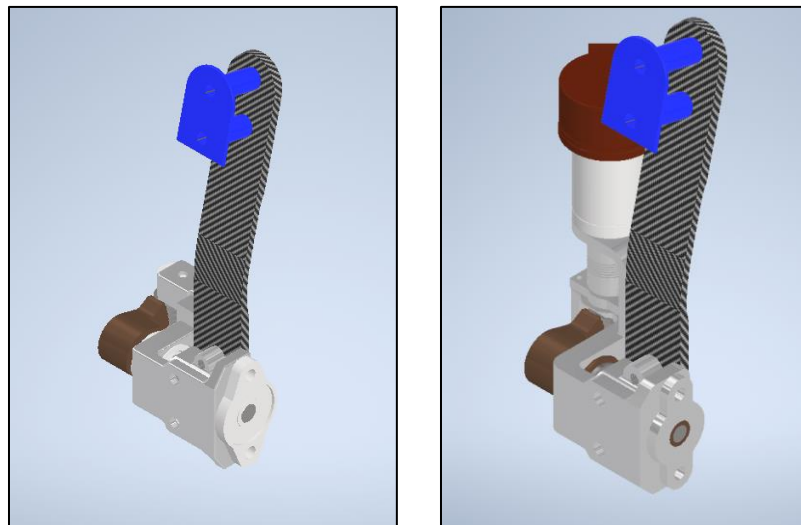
Design modifications. The initial design (left) had too much play in the bearings and shafts. The revised design (right) uses bushings, tighter tolerances, and bigger shafts, overcoming the problem.
